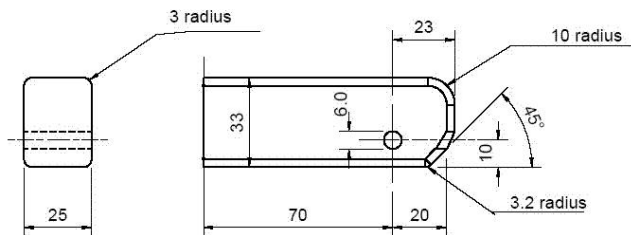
Rear and Side View of Checking Device for Lower Connector System - Envelope Dimensions
